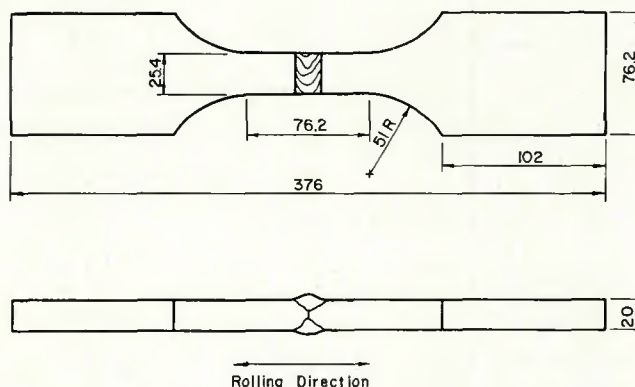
Machined dimensions of test specimens. All dimensions in millimeters
